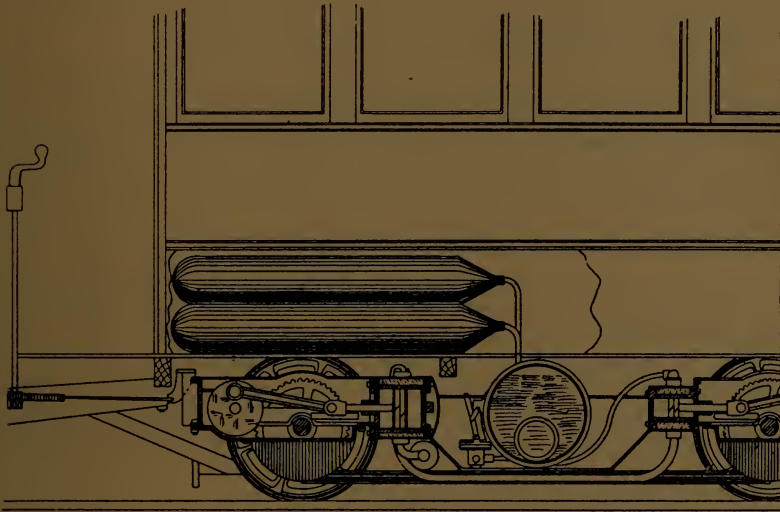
SECTIONAL VIEW OF MOTOR CAR.
